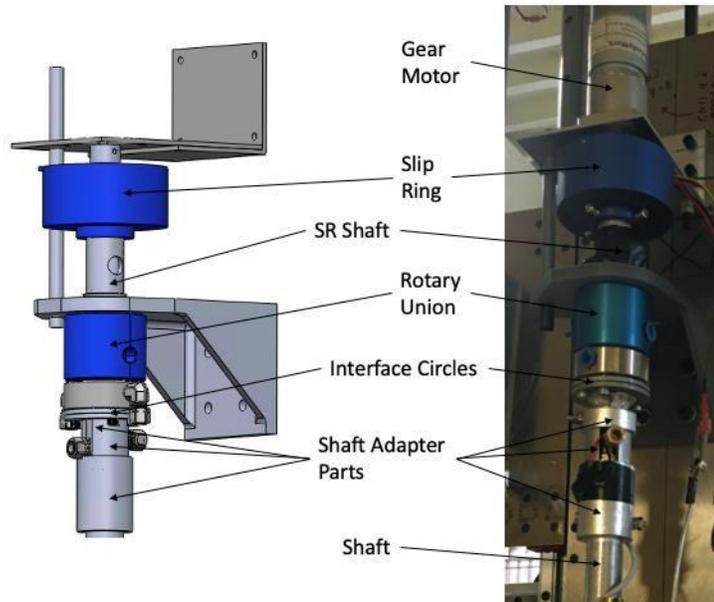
Rotary joint CAD model (left) and manufactured subsystem (right)
